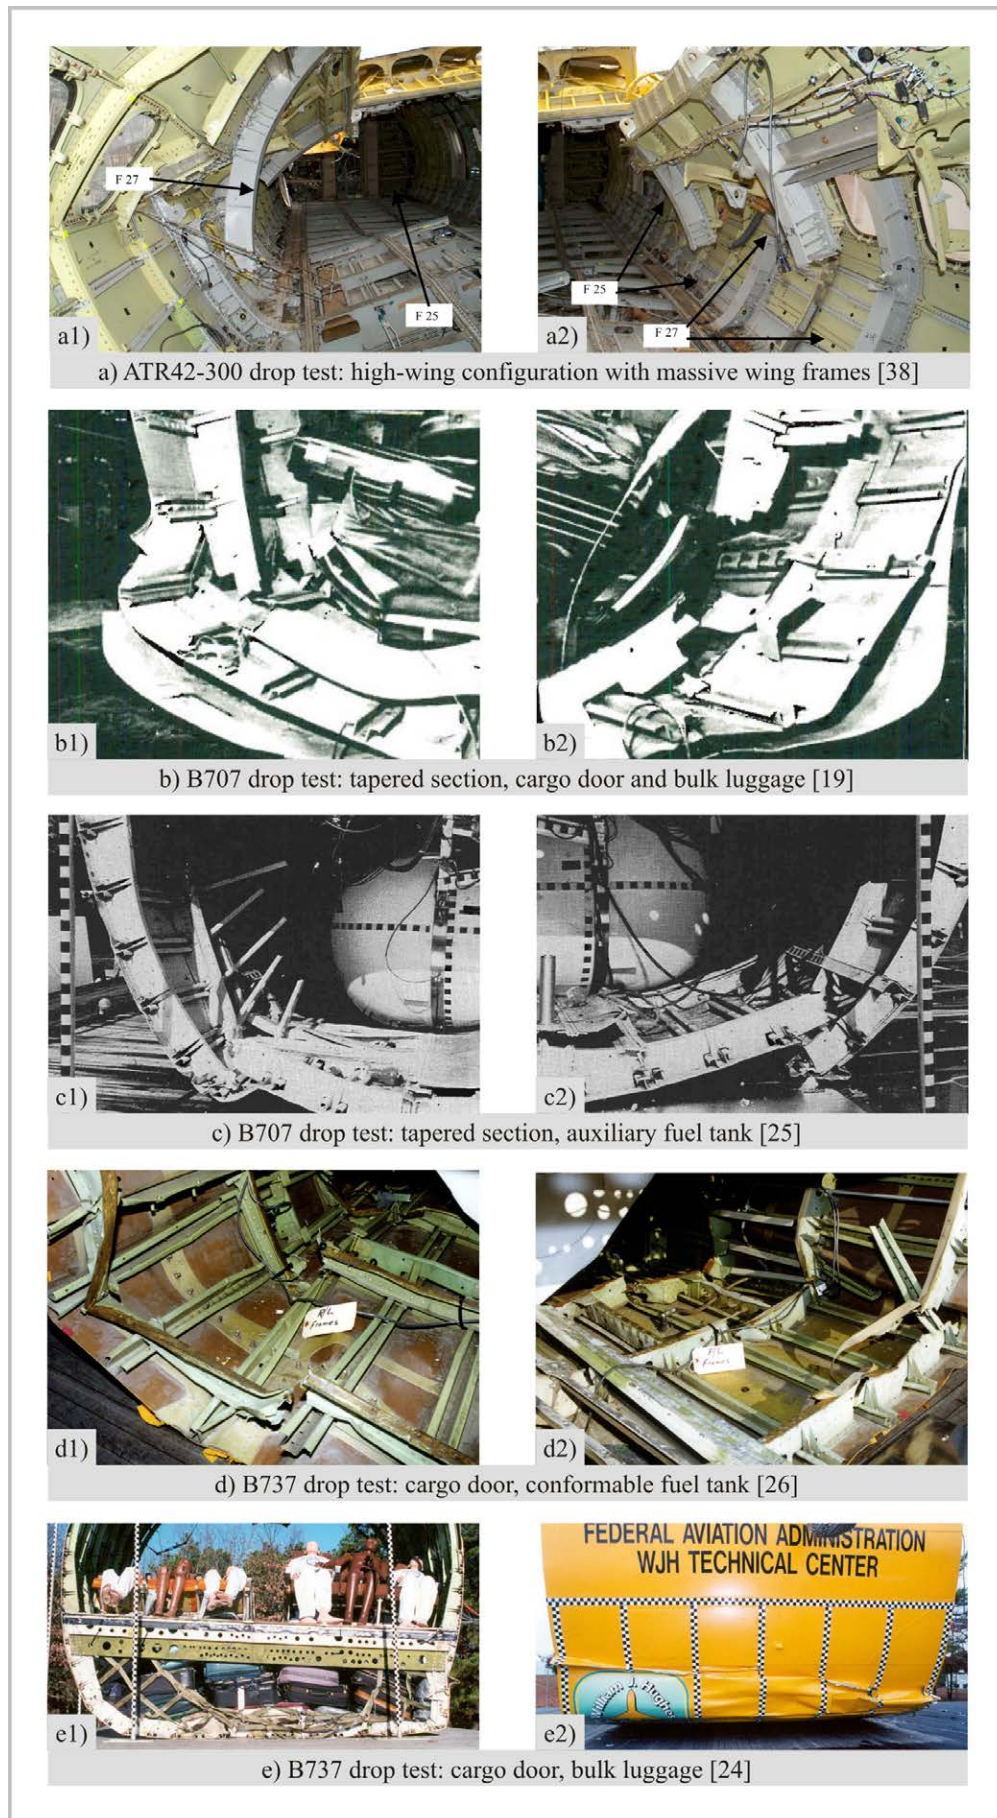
Further frame failure mechanisms (non-typical fuselage design)
